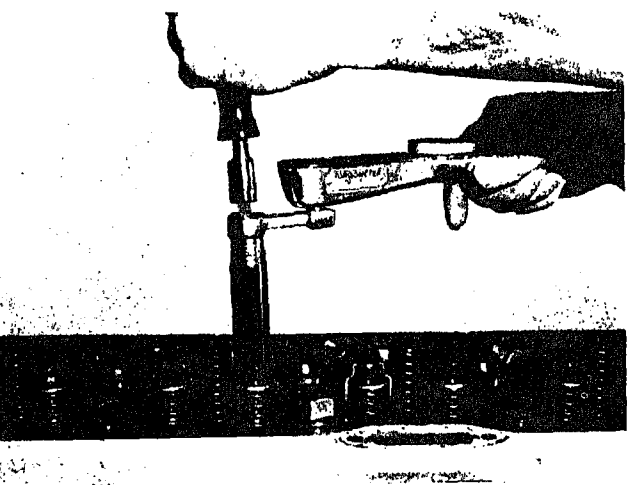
Torquing crosshead adjusting screw locknuts
